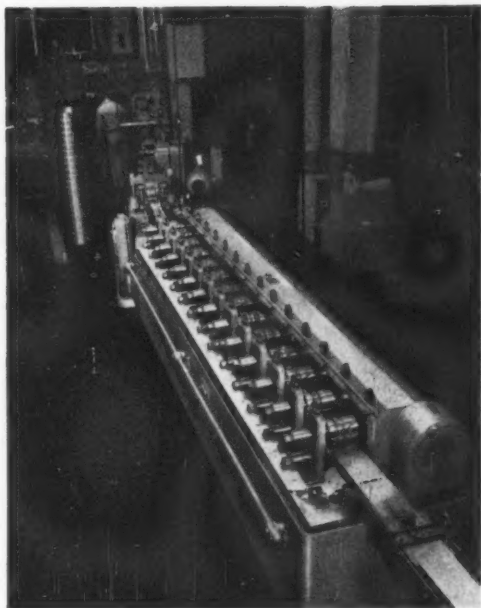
The Integral Stiffeners in the Shroud Section are Roll-formed on this 14-stand Machine
